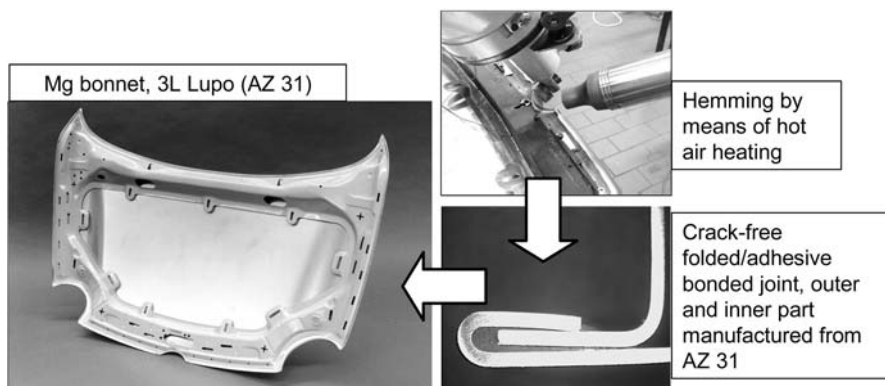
Magnesium sheet hemming using the example of a magnesium demonstrator bonnet (3L Lupo)
